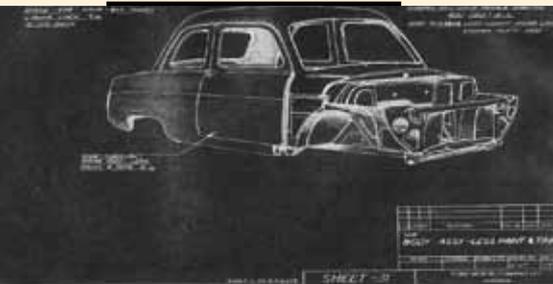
Blueprints in isometric projection of the body shell and floor plan.
